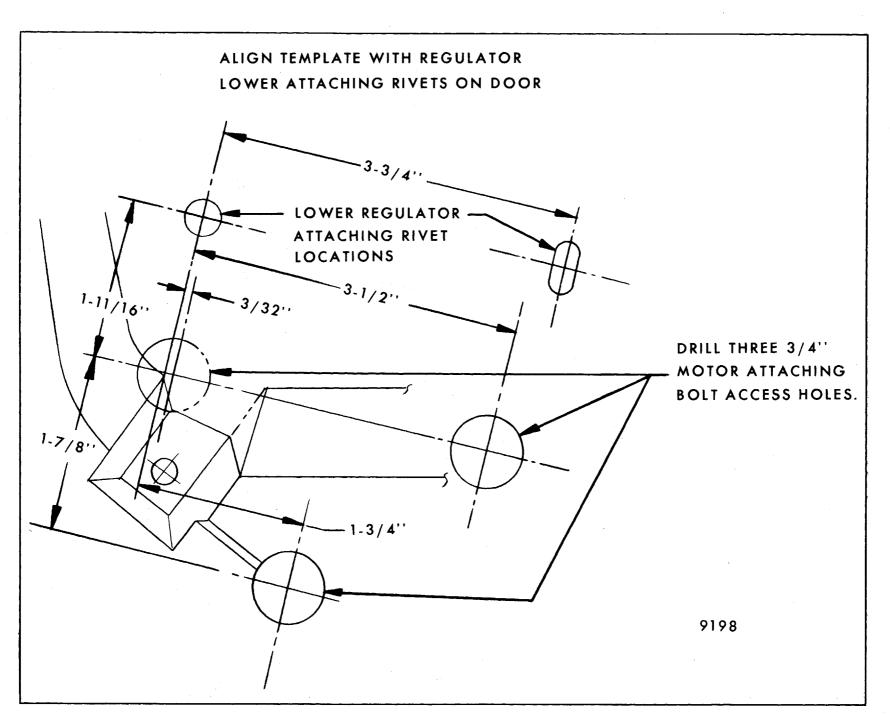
Window Regulator Reference Points for Locating Window Motor to Regulator Attaching Bolts - K Style, Rear Door
